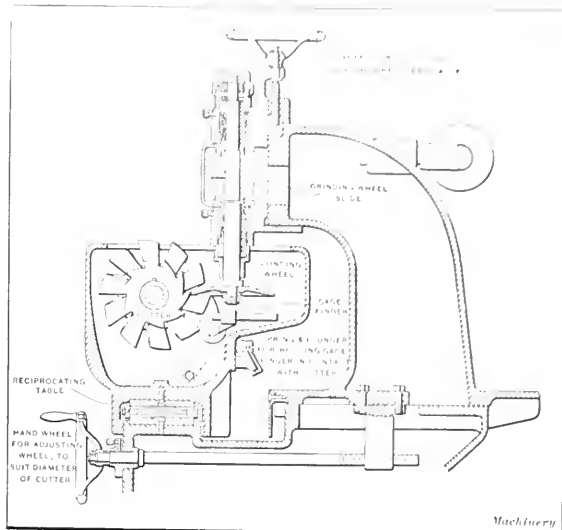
Cross-section through Grinder showing the Gage Finger for measuring the Peripheral Eccentricity
